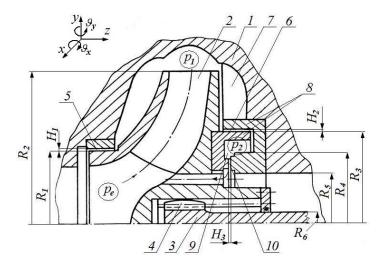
Geometry of the impeller with a balancing device: 1- pump casing, 2- impeller, 3- shaft; 4 – ball joint; 5, 6 – longitudinal seals of the impeller; 7 – radial vanes; 8- liner disks of balance device; 9- annular chamber; 10 – lateral (face) clearance.
